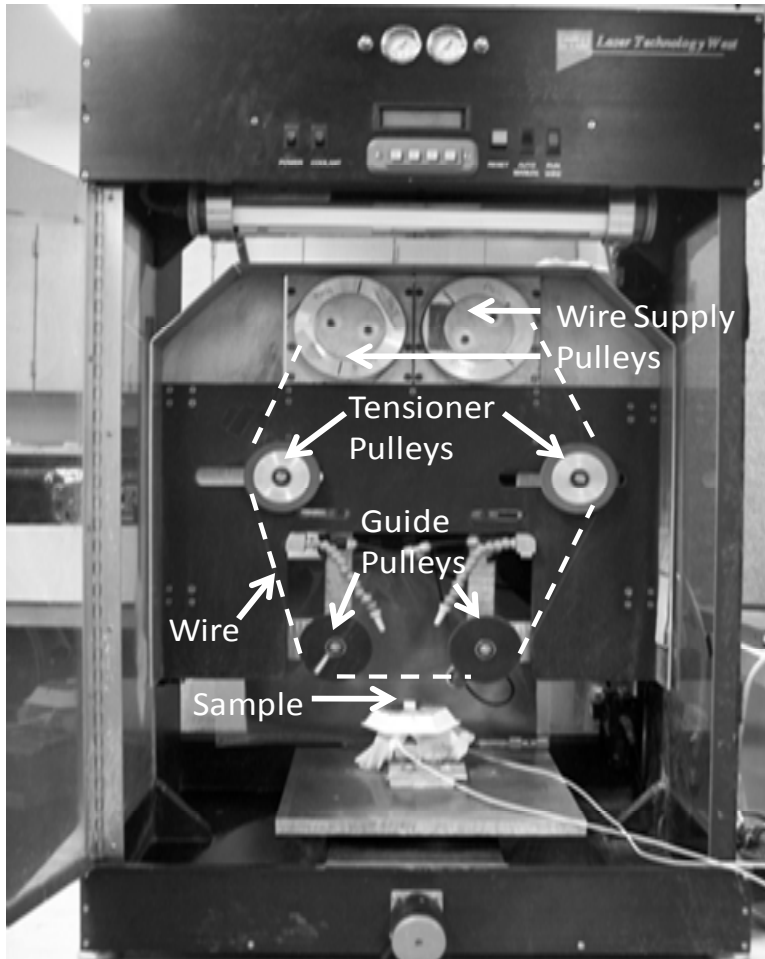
Single wire, spool-to-spool wire saw machine (DWT Inc., Millennium Model). The wire track is marked by the dashed line.
